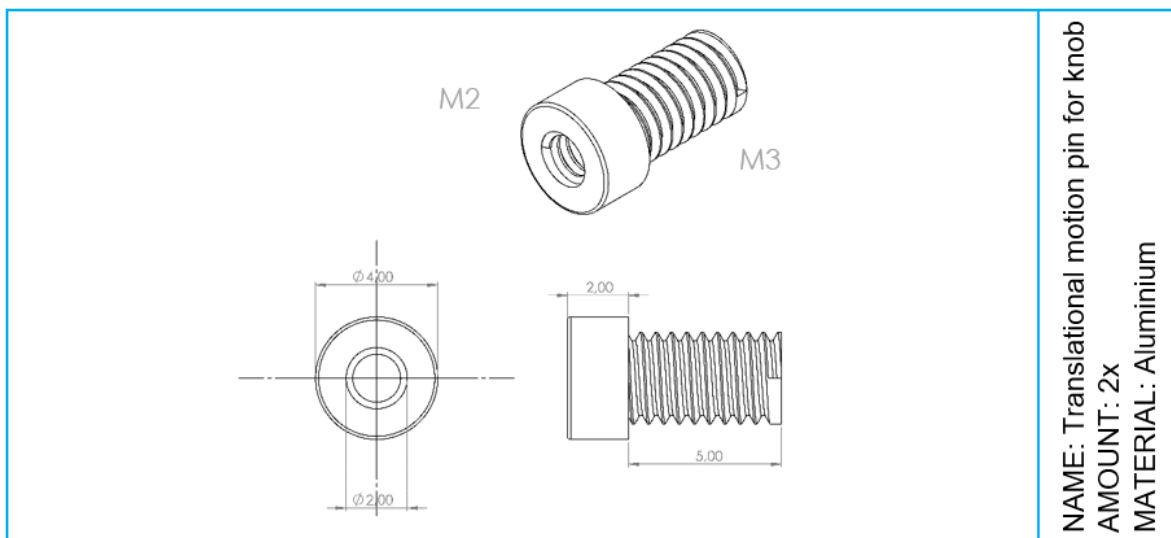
Construction drawings of the pin connecting the translational motion mechanism to the translational motion input knob - Machined prototype
